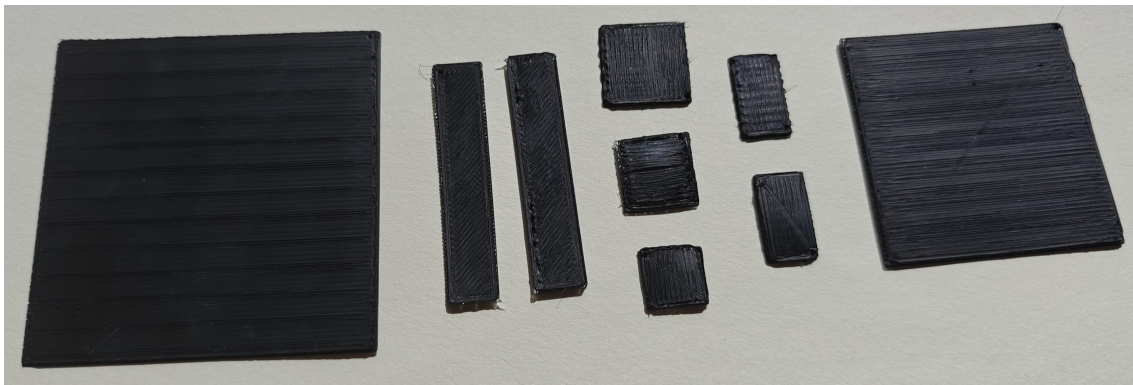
Prints without top layer, dielectric layer printed properly.
